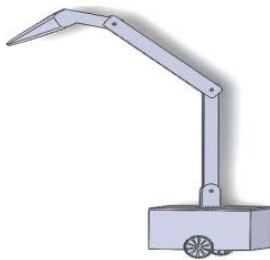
A Two Wheeled Mobile Welding Manipulator for Spherical Objects
